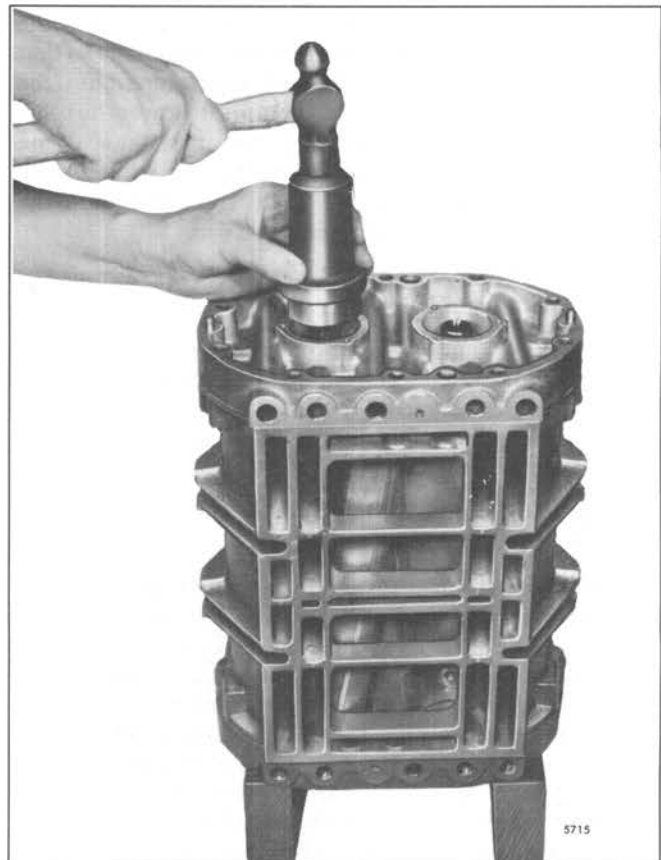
Installing Roller Bearings on Rotor Shafts and in Front End Plate with Tool J 6270–13
